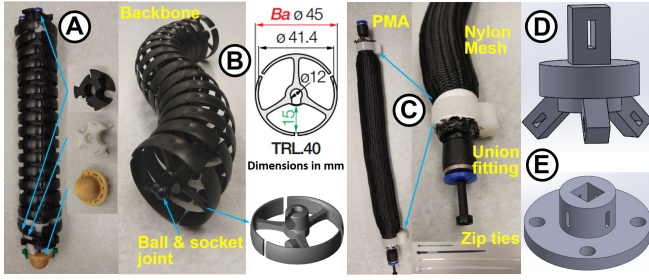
(A) Assembled soft robotic finger, (B) length constraining mechanism, (C) A PMA, (D)-(E) CAD models of gripper base unit used to assemble fingers. (D) and (E) connect the gripper to AUBO-i5 6-DoF industrial robot.
